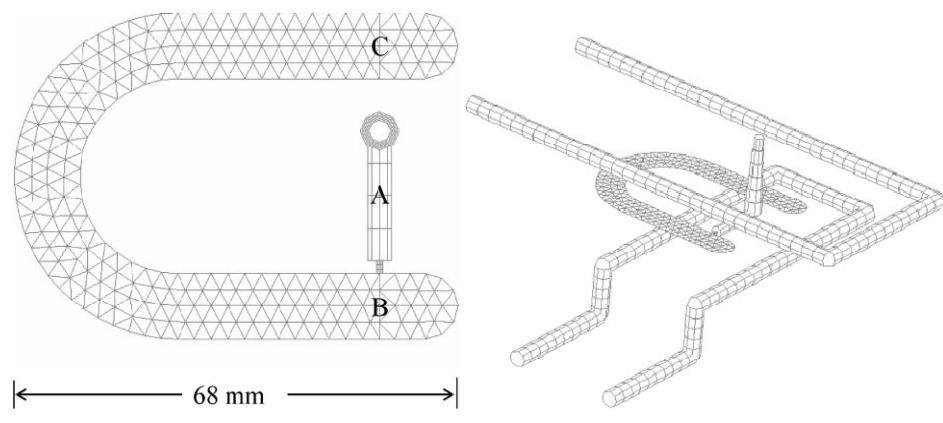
4: Cooling channel layout and part geometry for U-shaped [34]
